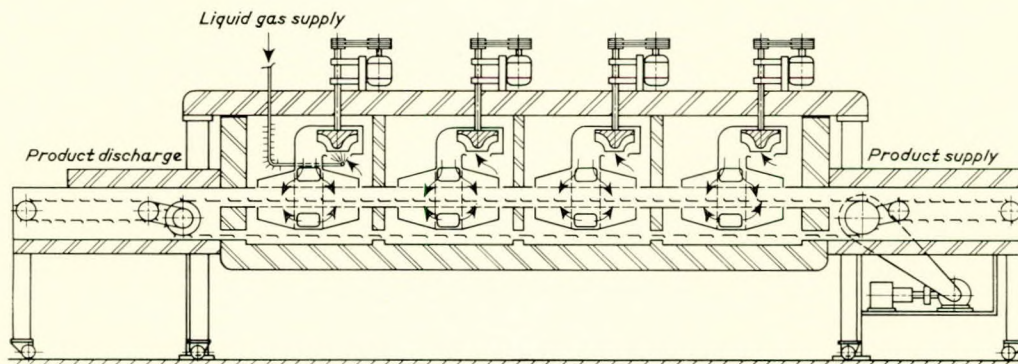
Schematic cross-section of Stork-Werkspoor cryogenic freezing tunnel
